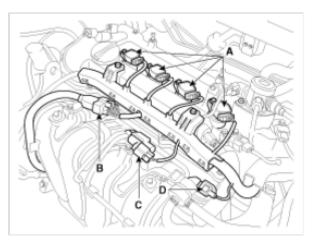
Identifying Intake And Exhaust Oil Control Valve Connectors Courtesy of HYUNDAI MOTOR AMERICA
